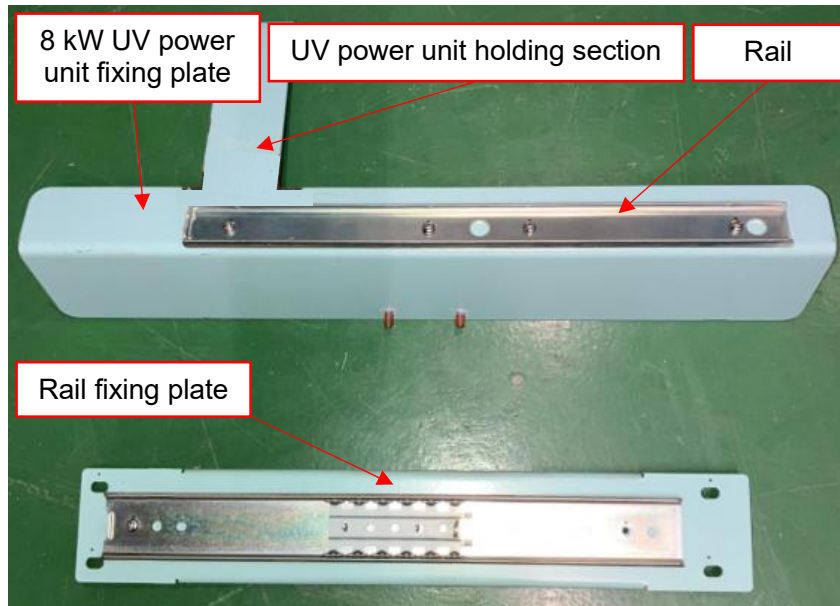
Attachment of rail to 8 kW UV power unit fixing plate (even side)
